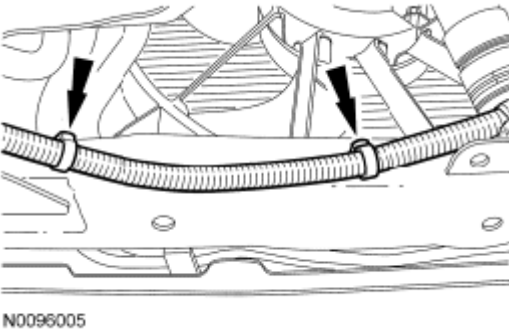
Locating EPAS System Wiring Harness Pin-Type Retainers
